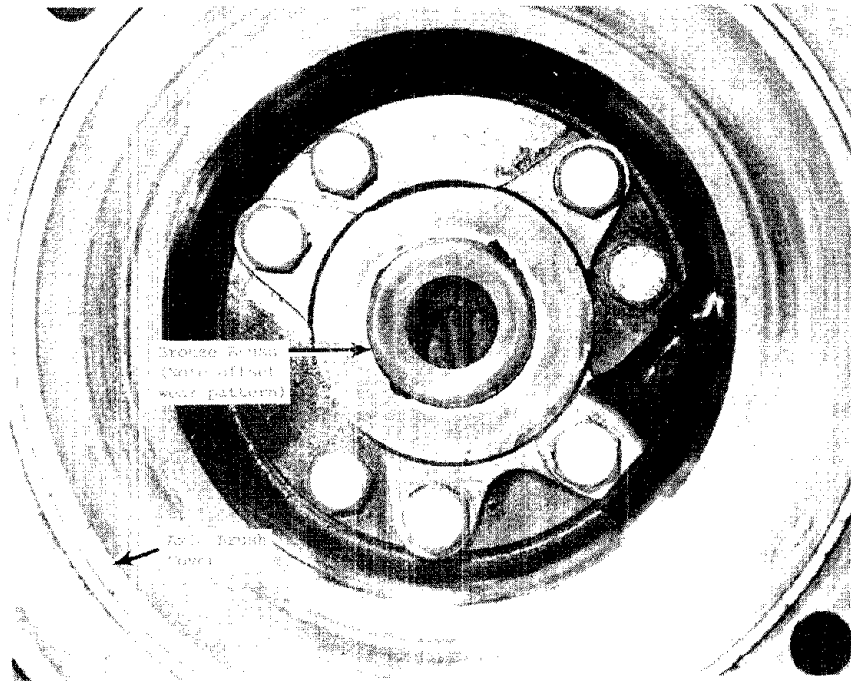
AXLE BRUSH ASSEMBLY (BRONZE BRUSH).
